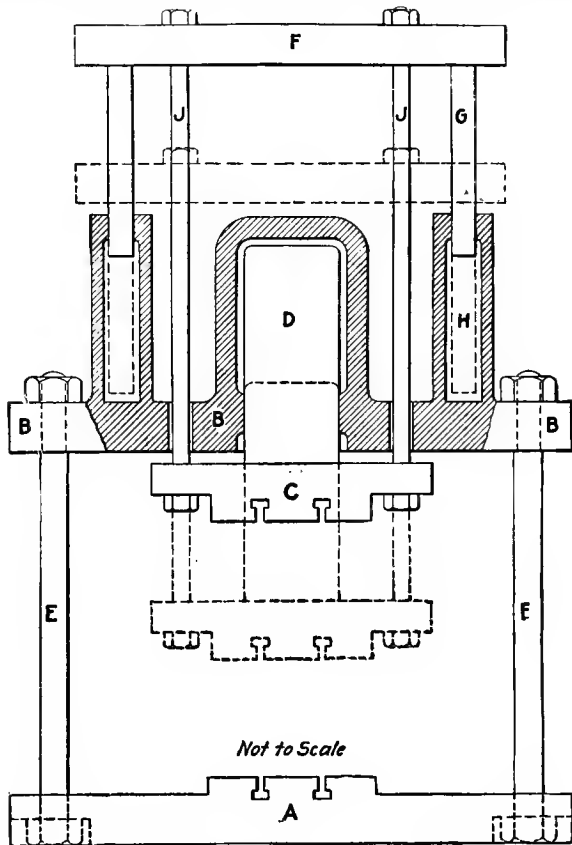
DIAGRAM SHOWING ACTION OF SHELL-FORGING PRESS
